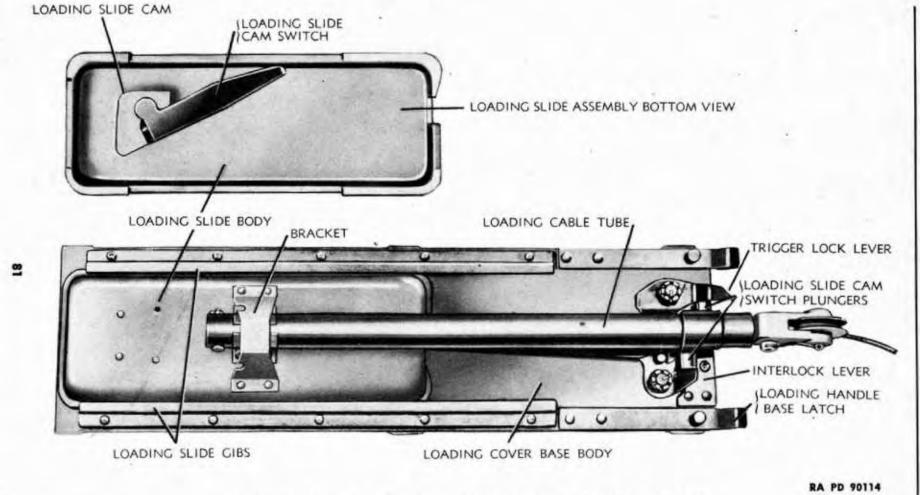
Loading Cover and Slide Assembly (Gun M10)
